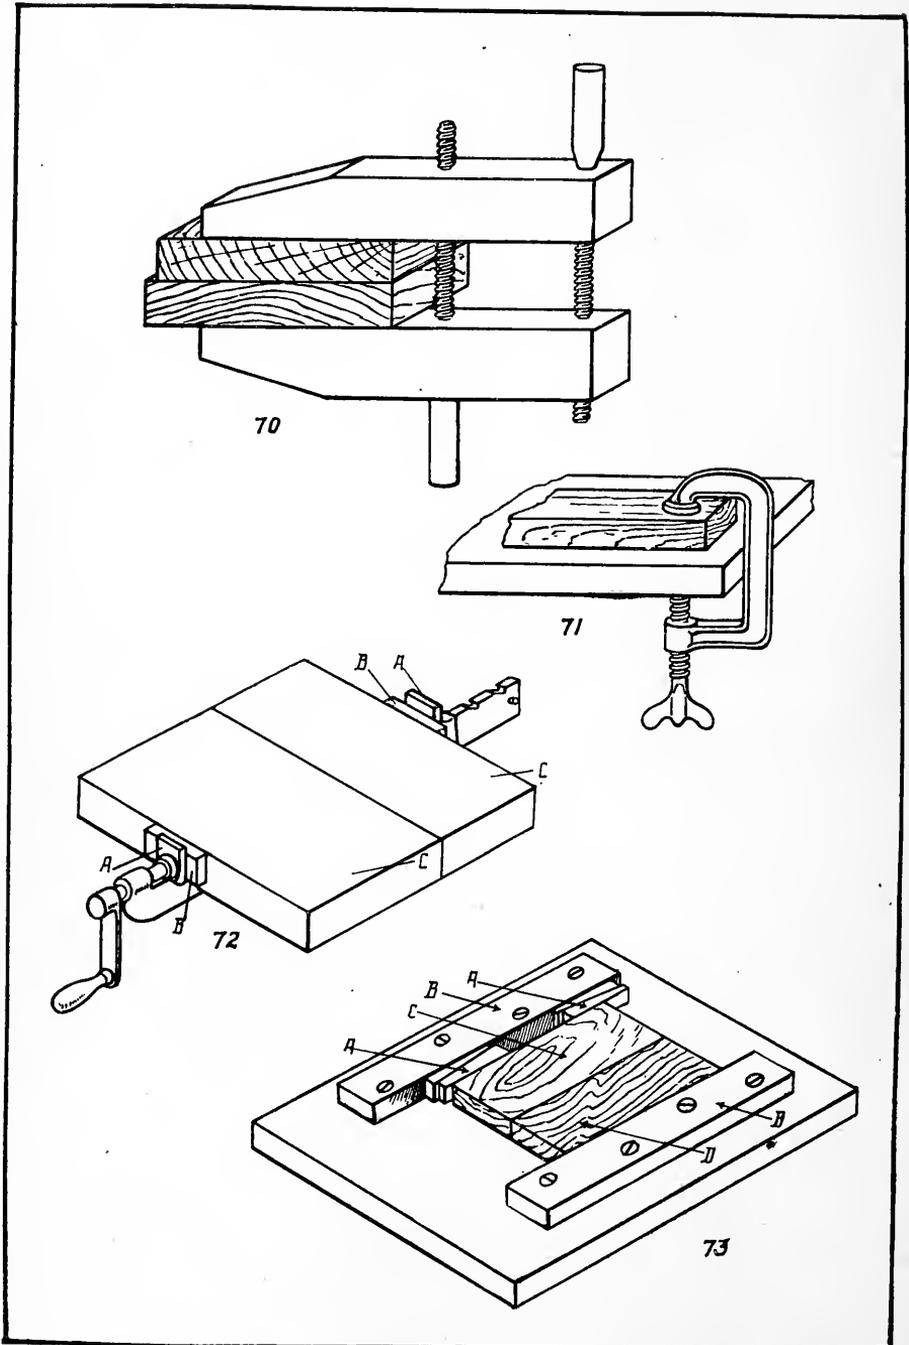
USE OF HAND SCREWS. FIG. 71.—USE OF C-CLAMP. FIG. 72.—USE OF BAR CLAMP. FIG. 73.—IMPROVISED CLAMP.
